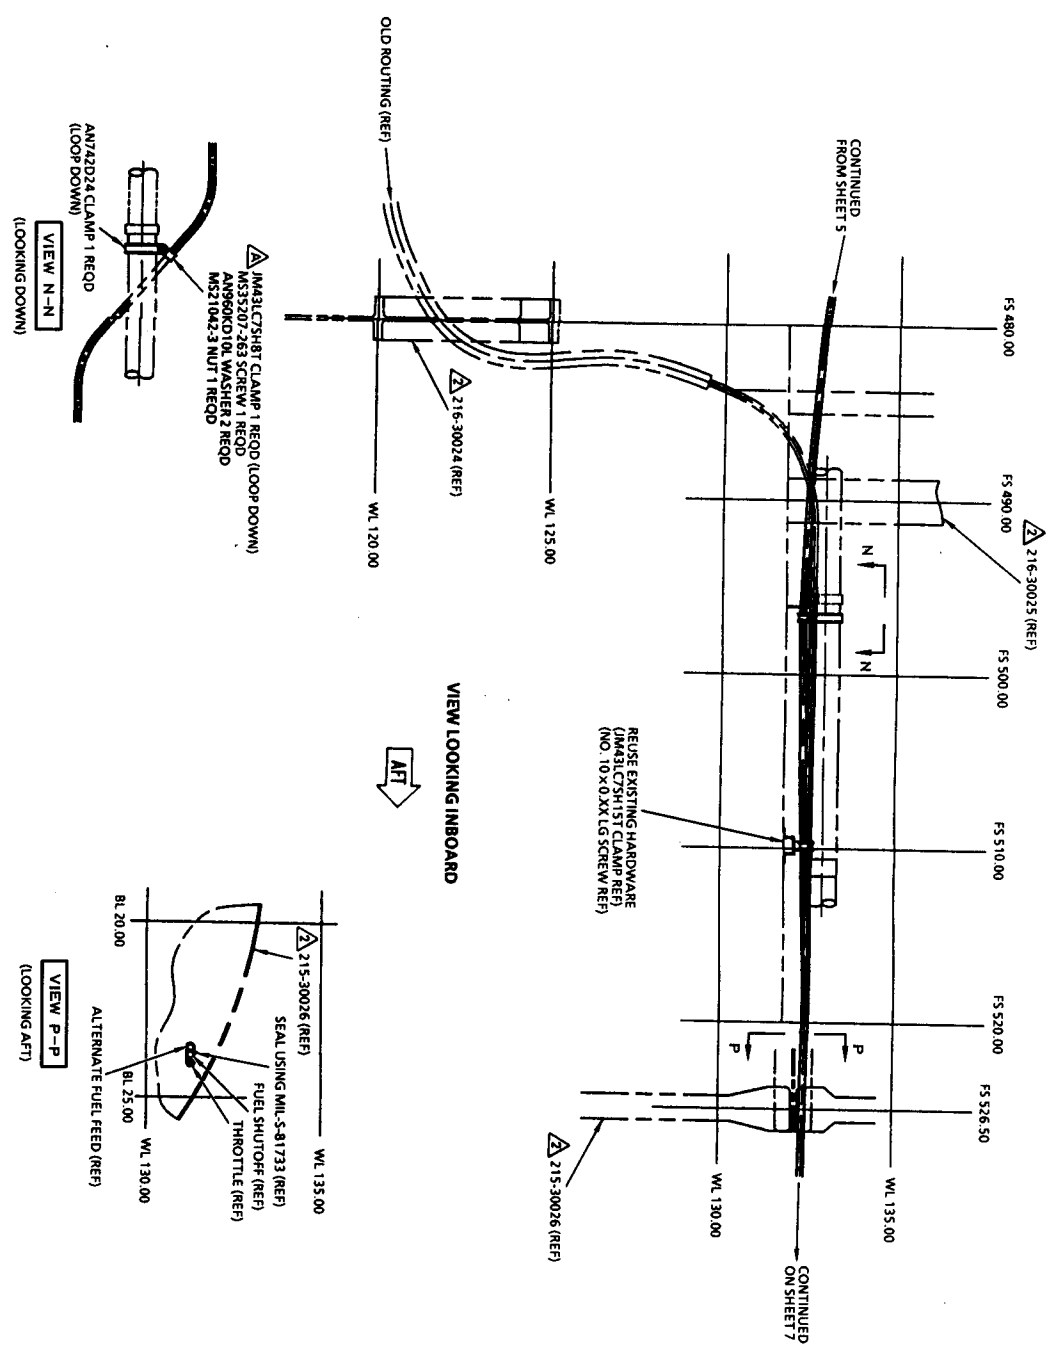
A. Throttle (Controler) Cable Overwing Retoure and Clamping
